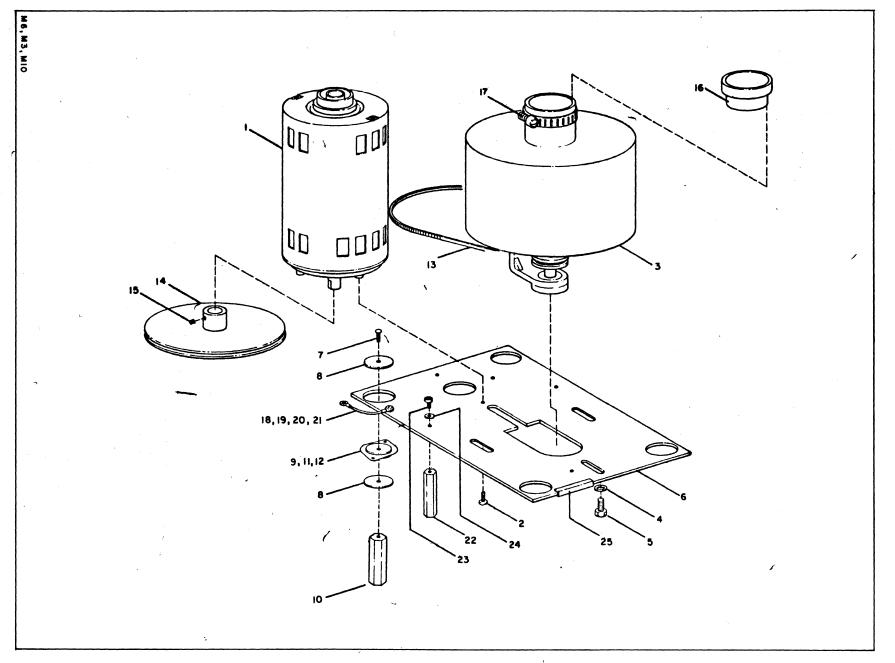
VACUUM PUMP ASSEMBLY
